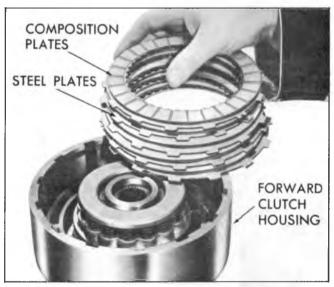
T--Installing Forward Clutch Composition and Steel Plates
